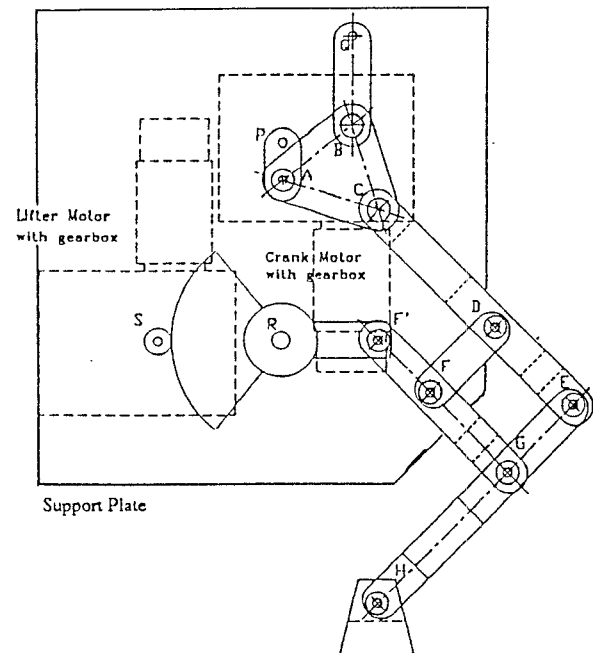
The Complete Leg Assembly With Top Support Plate Removed.
